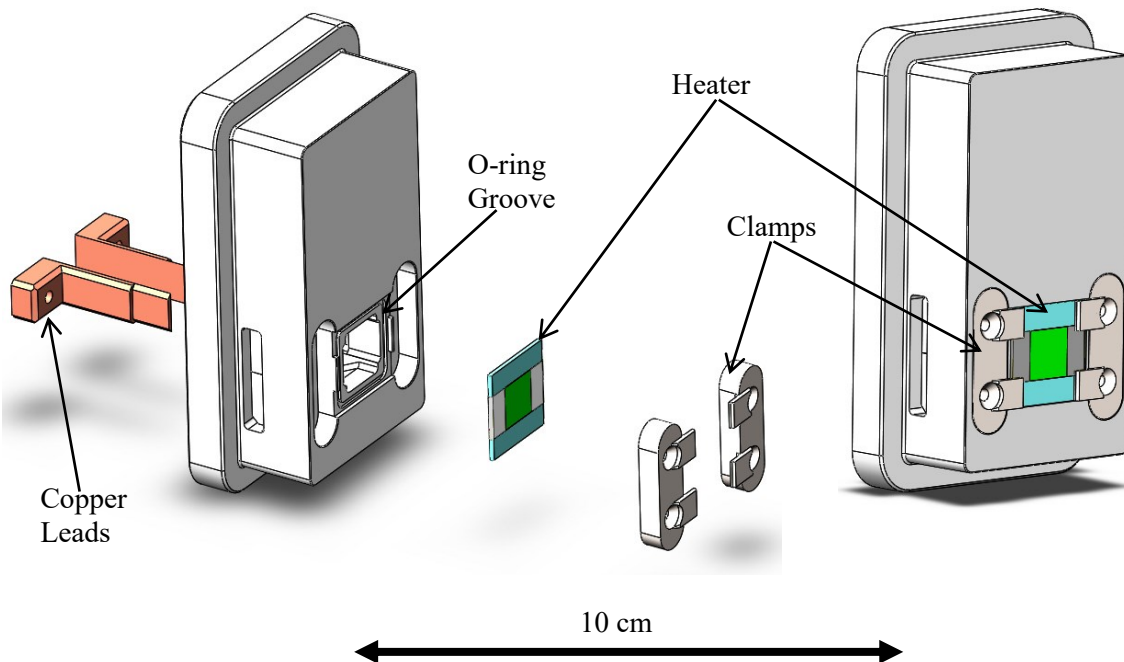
Exploded (left) and assembled (right) views of the heater cartridge
